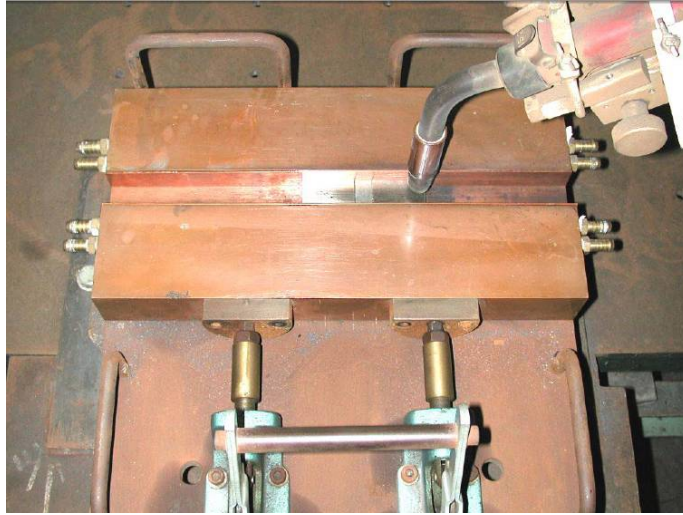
The copper welding fixture in which the diffusible hydrogen test assemblies were welded.
